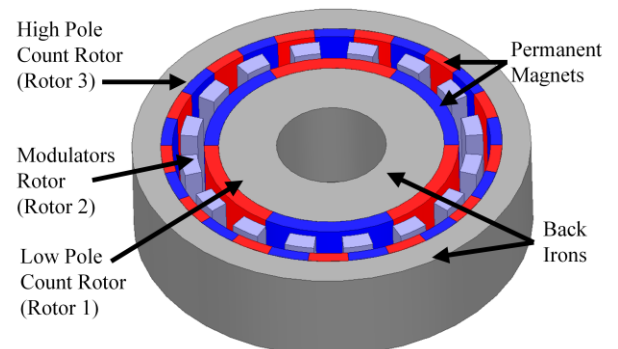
Coaxial radial flux magnetic gear with surface mounted permanent magnets.
